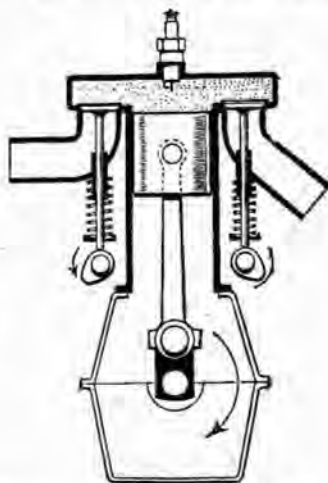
At the end of the compression stroke; ignition is about to take place, and the piston will then be driven downwards on the power stroke.
